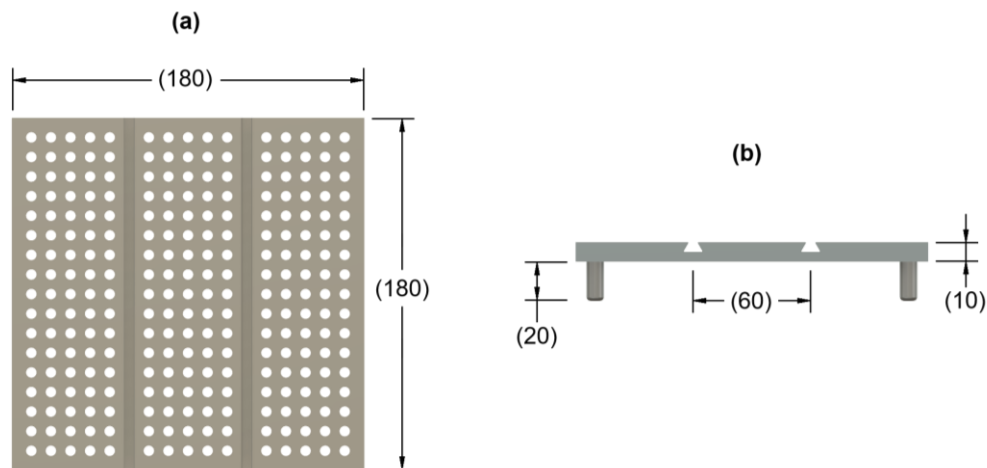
(a) Top view of the baseplate showing holes of a gridded pattern and dovetail joints. (b) Front view of baseplate showing the bumper feet placement. All dimensions are in mm.
